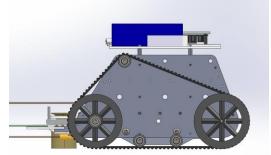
MECHANICAL LAYOUT OF DRIVING MECHANISM
